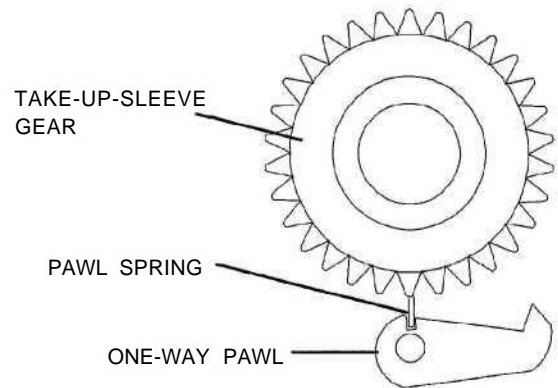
Take-up sleeve gear as viewed from bottom of take-up sleeve.
